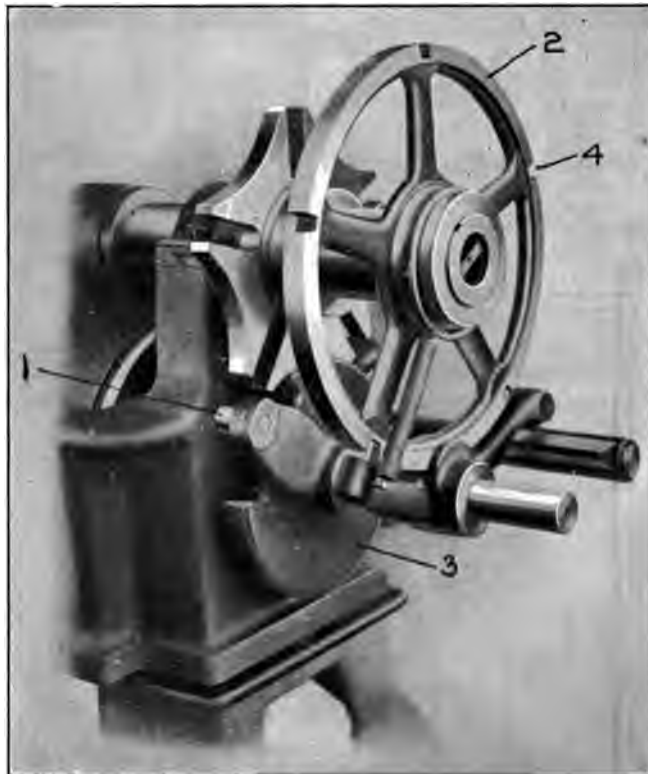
DEVICE FOR INDEXING AND LOCKING TURRET. NEW BRITAIN MACHINE CO.
